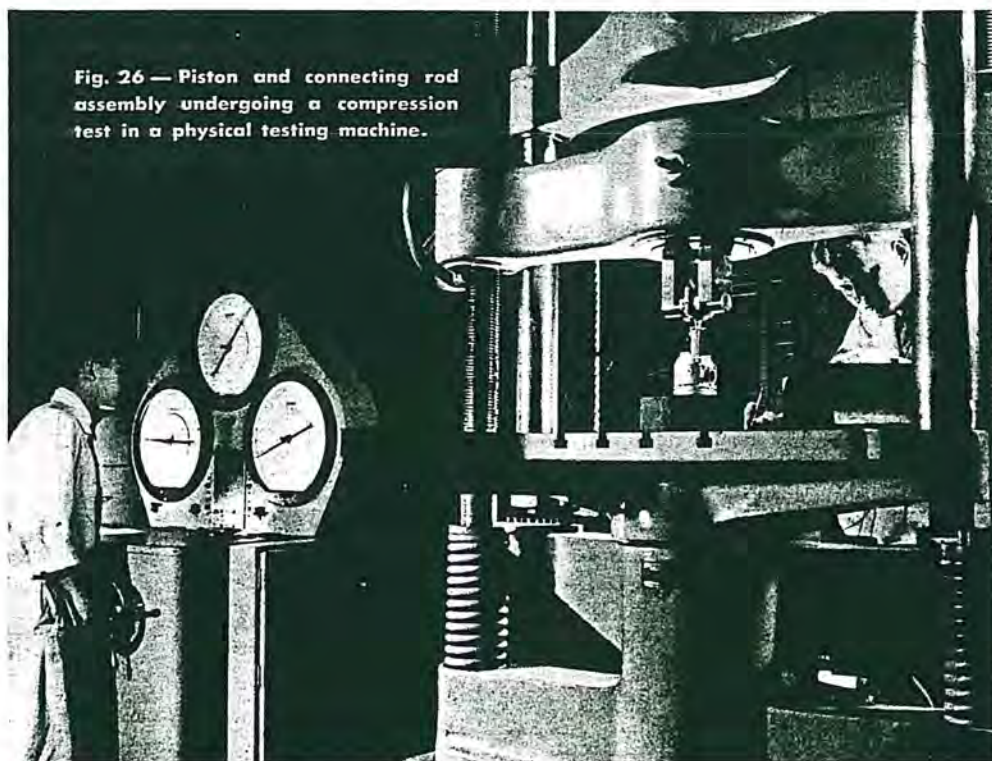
Piston and connecting rod assembly undergoing a compression test in a physical testing machine.
